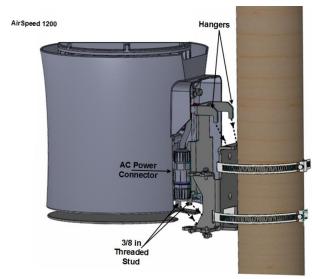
Securing AirSpeed 1200 to Mounting Bracket
